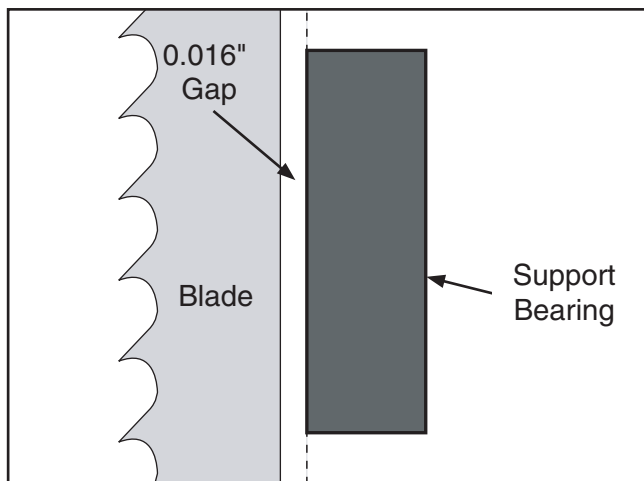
Blade should be aligned approximately 0.016" away from the bearing edge.
